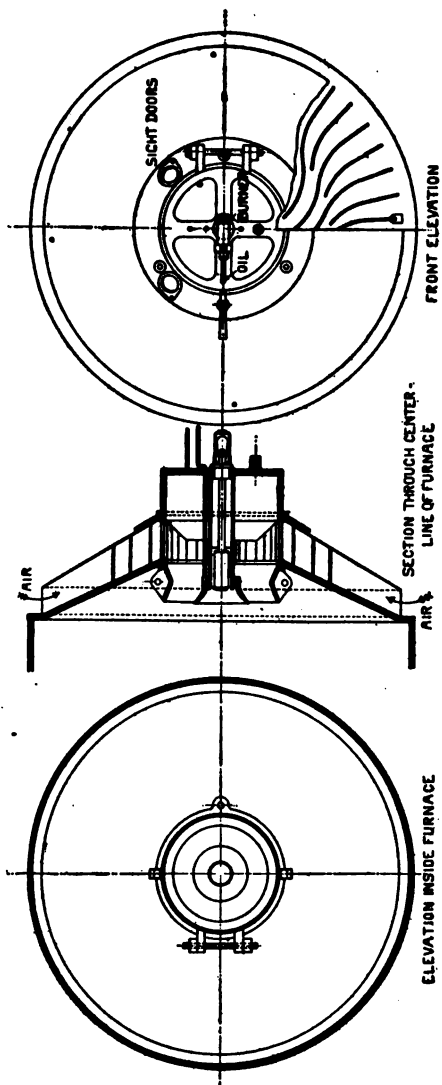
Oil Burning Furnace (White Fuel Oil Engineering Co., New York).
